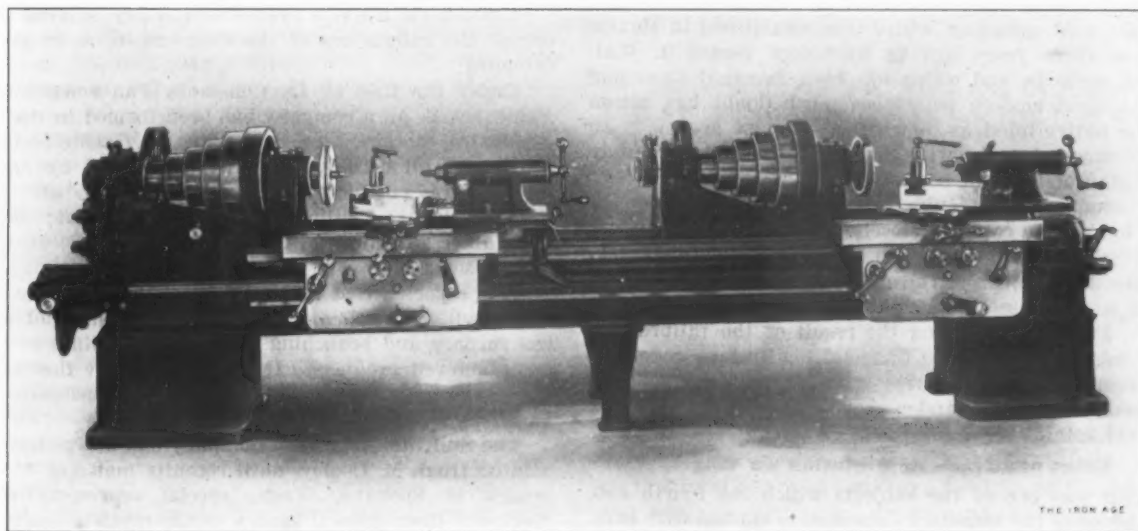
The Double Lathe on Which Both Operations are Performed Simultaneously.
